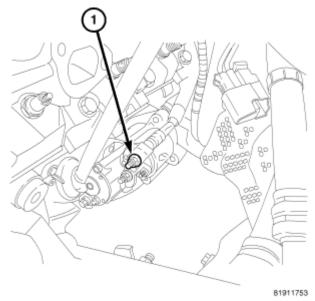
Locating Starter Wiring Courtesy of CHRYSLER LLC
